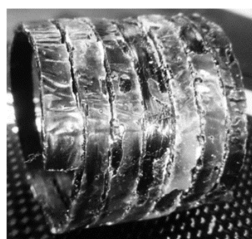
(c) CFRP coil spring (2×5) type UD. Fig. 10(d) CFRP coil spring (5×2) type UD.
